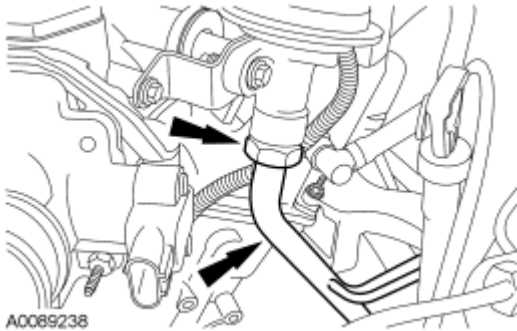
Locating Exhaust Gas Recirculation (EGR) Tube
